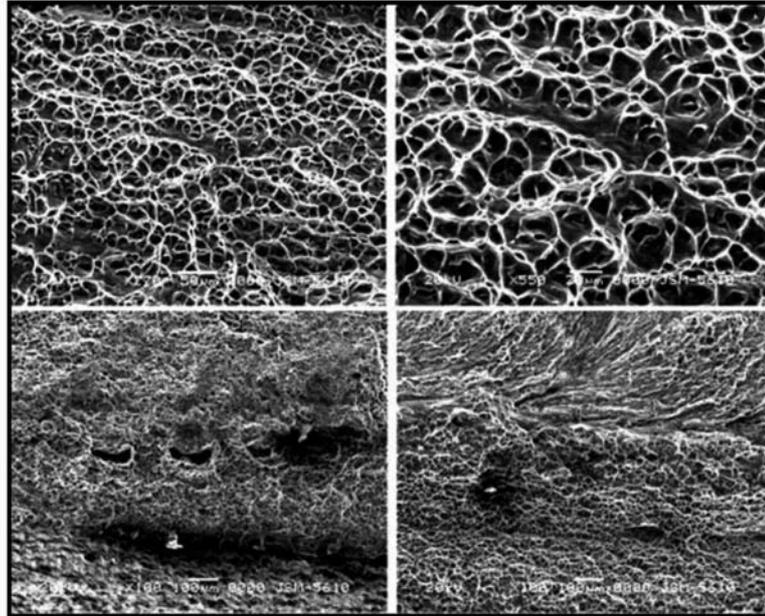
Tensile fractured surface of AA6082, hexagonal pin at 62 mm/min
